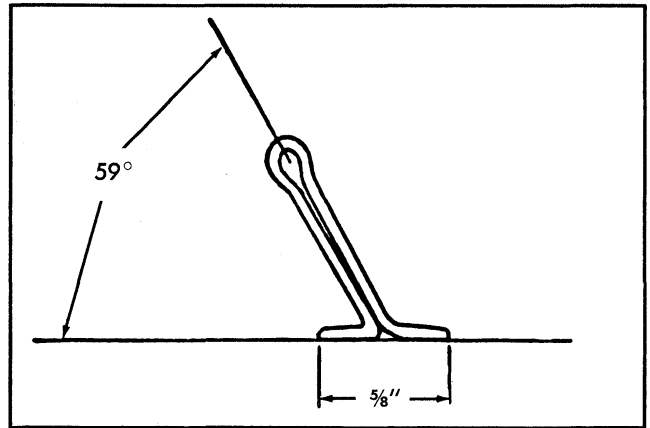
Tool for Removing Upper Half of Main Bearing
